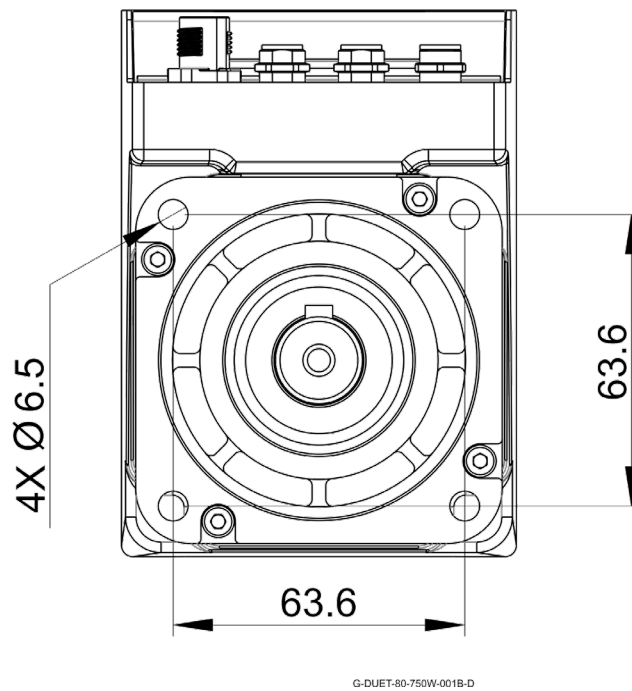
Front View Details and Rotor Shaft/Keyway Details
